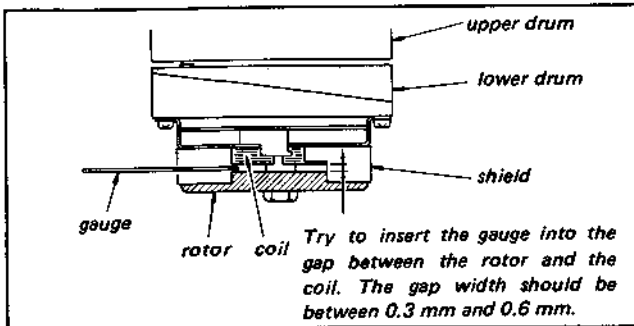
Checking the motor gap width after replacing the drum assembly
